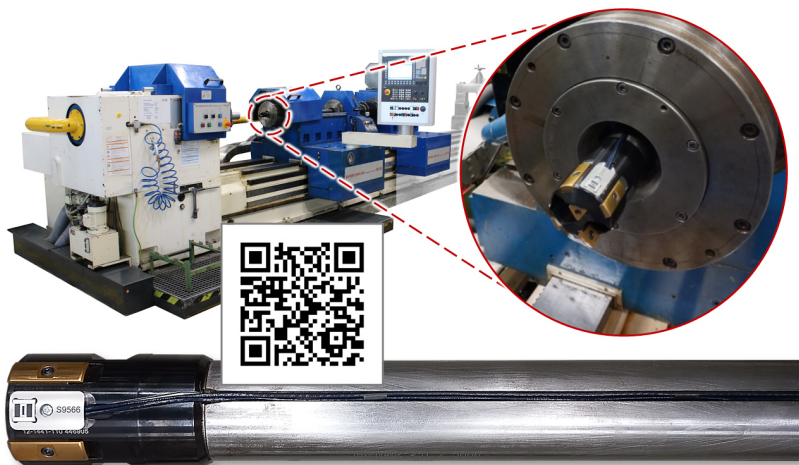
Instrumented drill head for MBN analysis mounted onto the boring bar in the deep drilling machine. The QR code links to an animation of the drill head sensor [222]
